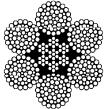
6 × 61 Filler Wire Warrington Seale IWRC
